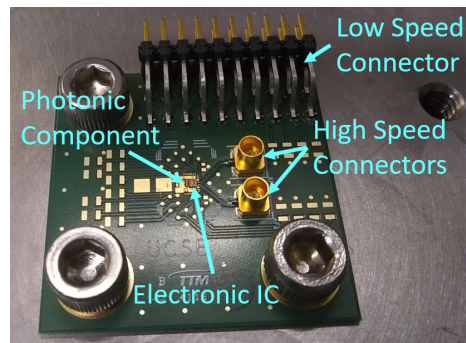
An example optoelectronic assembly on an FR-4 PCB.
